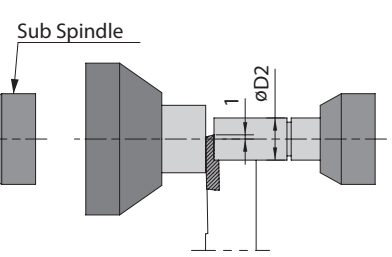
(When the tool edge has proceeded 1 mm beyond the center of workpiece)
